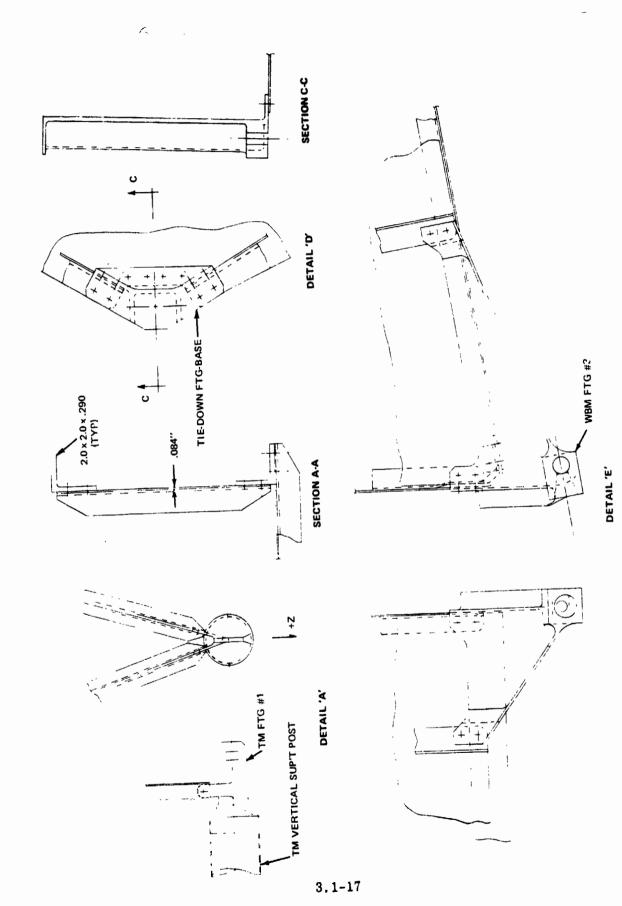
B T-1A STRUCTURAL DETAILS (SHEET 4 OF 4)
